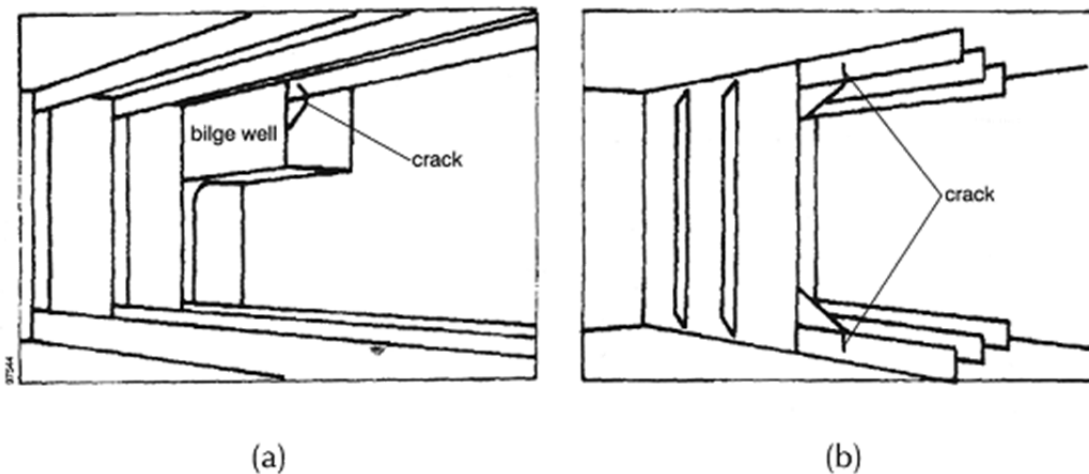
(3) Cracking at the end connection with side walls of bilge well and cracking at the end of an additional girder
